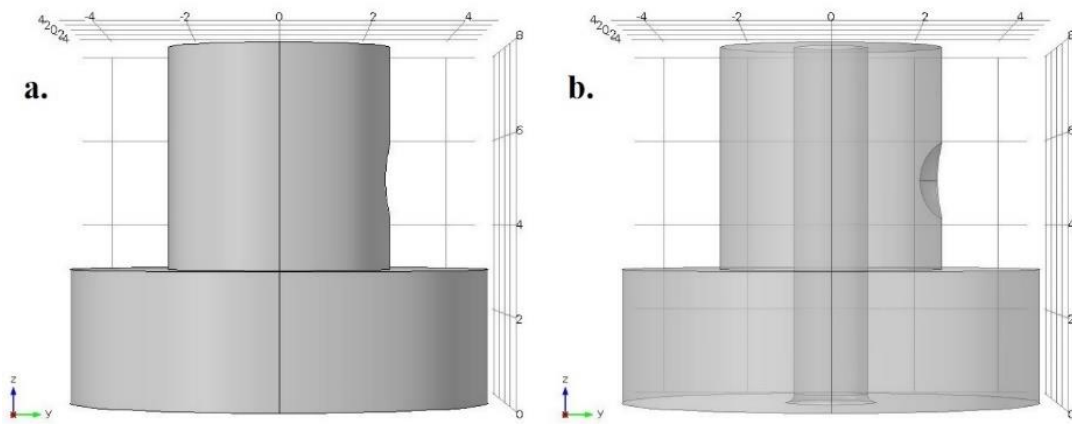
Schematic illustration of front view of piston lower end type 3, (a. solid view, b. transparent view)
